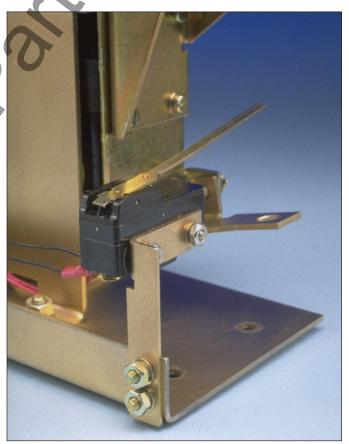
Auxiliary Switch Assembly installed on the Mounting Platform.
